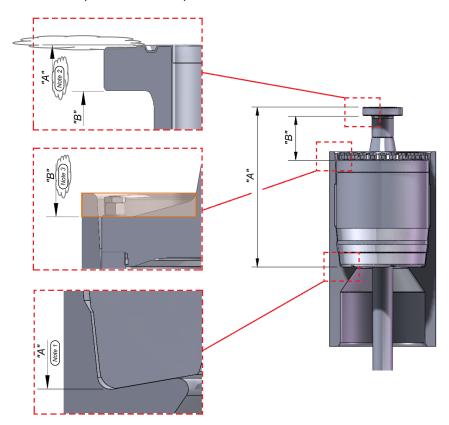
Flange elevation "A" above Receptacle/ FXJ Body bottom, and minimum clearance "B" for subsea flange assembly/ disassembly.
